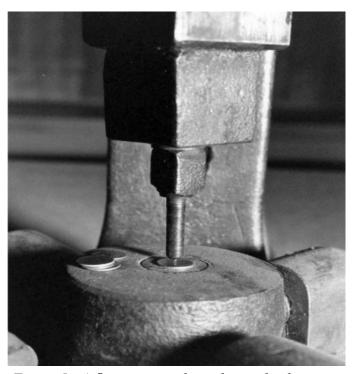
A fly press punch used to make the center hole in the wheel blank.
